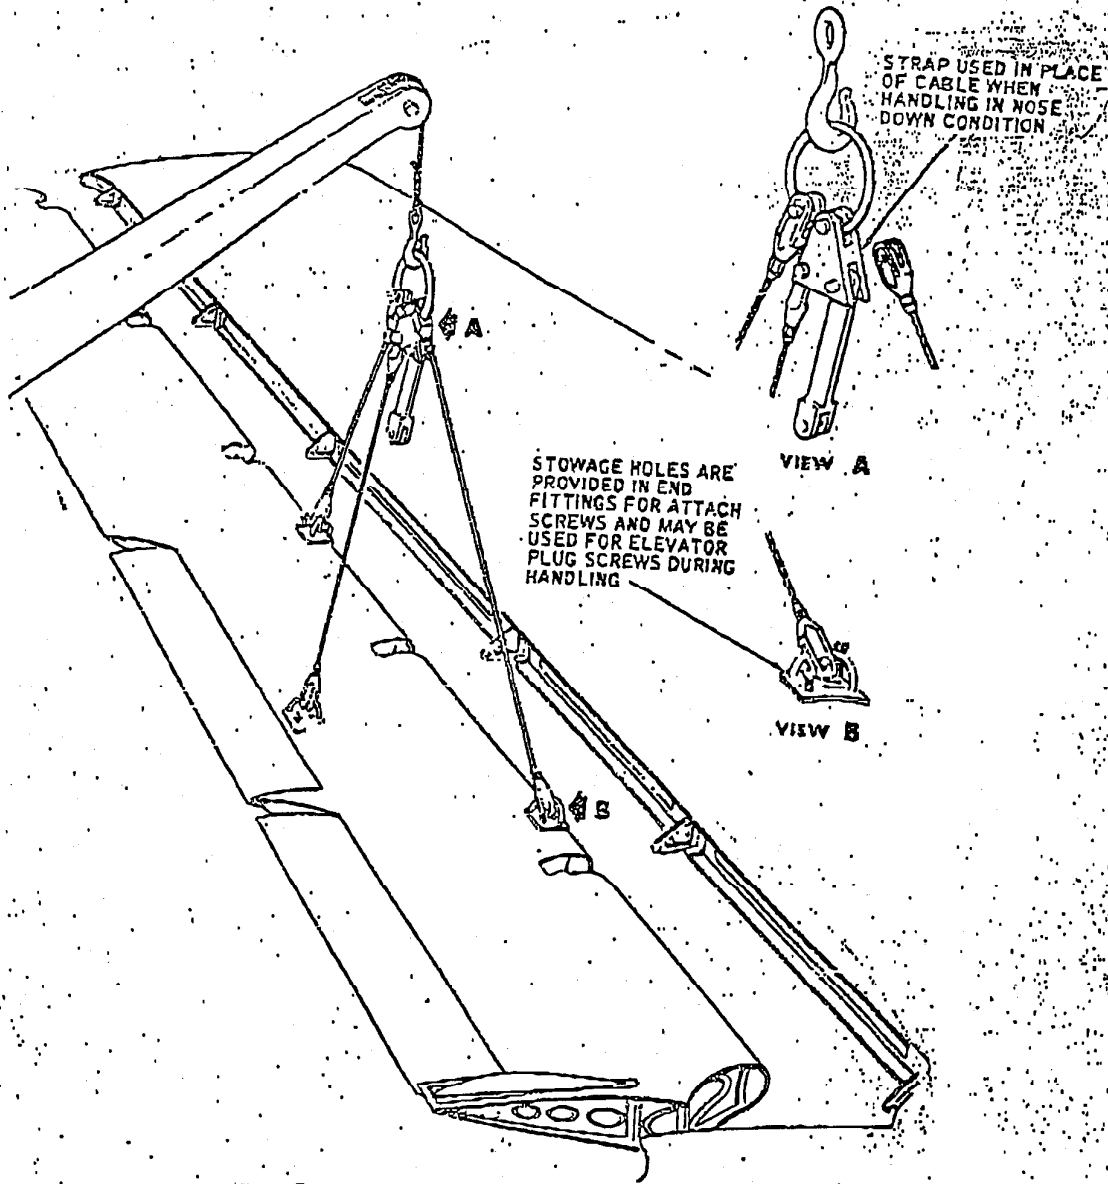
SPECIAL ARM ASSEMBLY - USED ON MR55201-004 ELEVATOR
